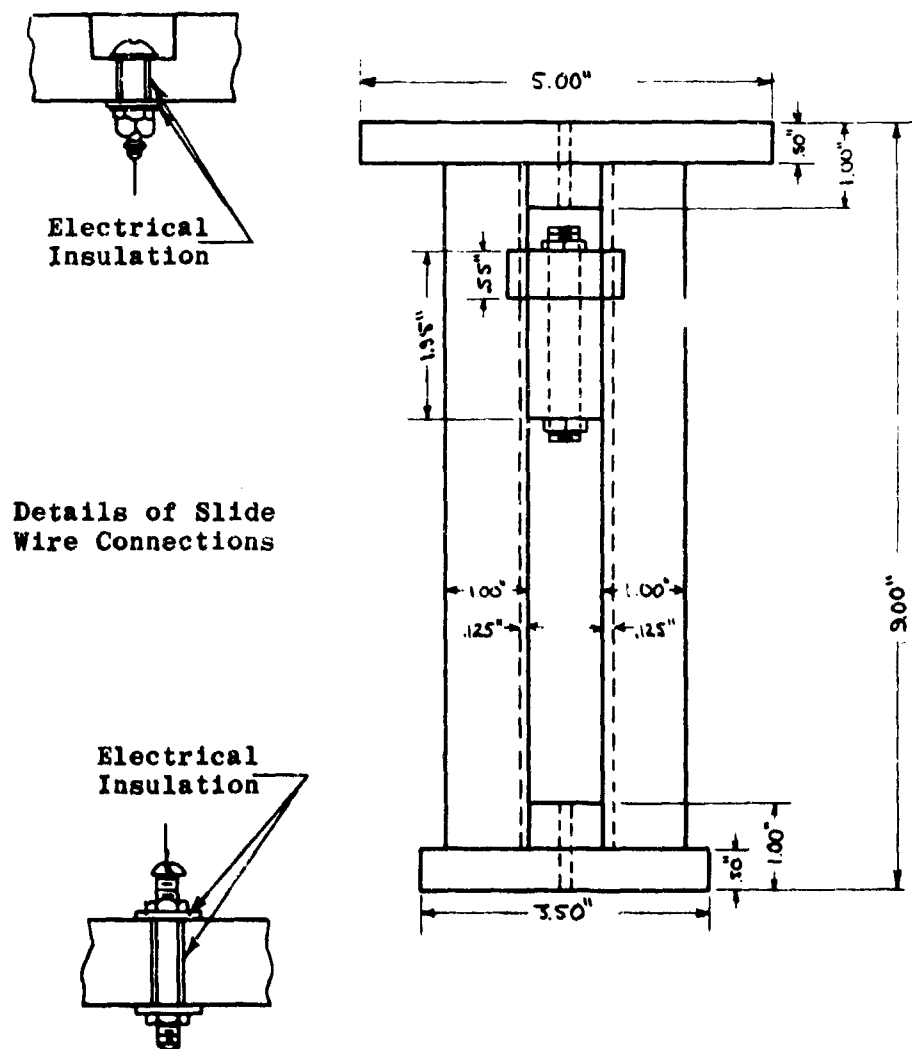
DETAILED DRAWING OF SLIDE WIRE GAGE
